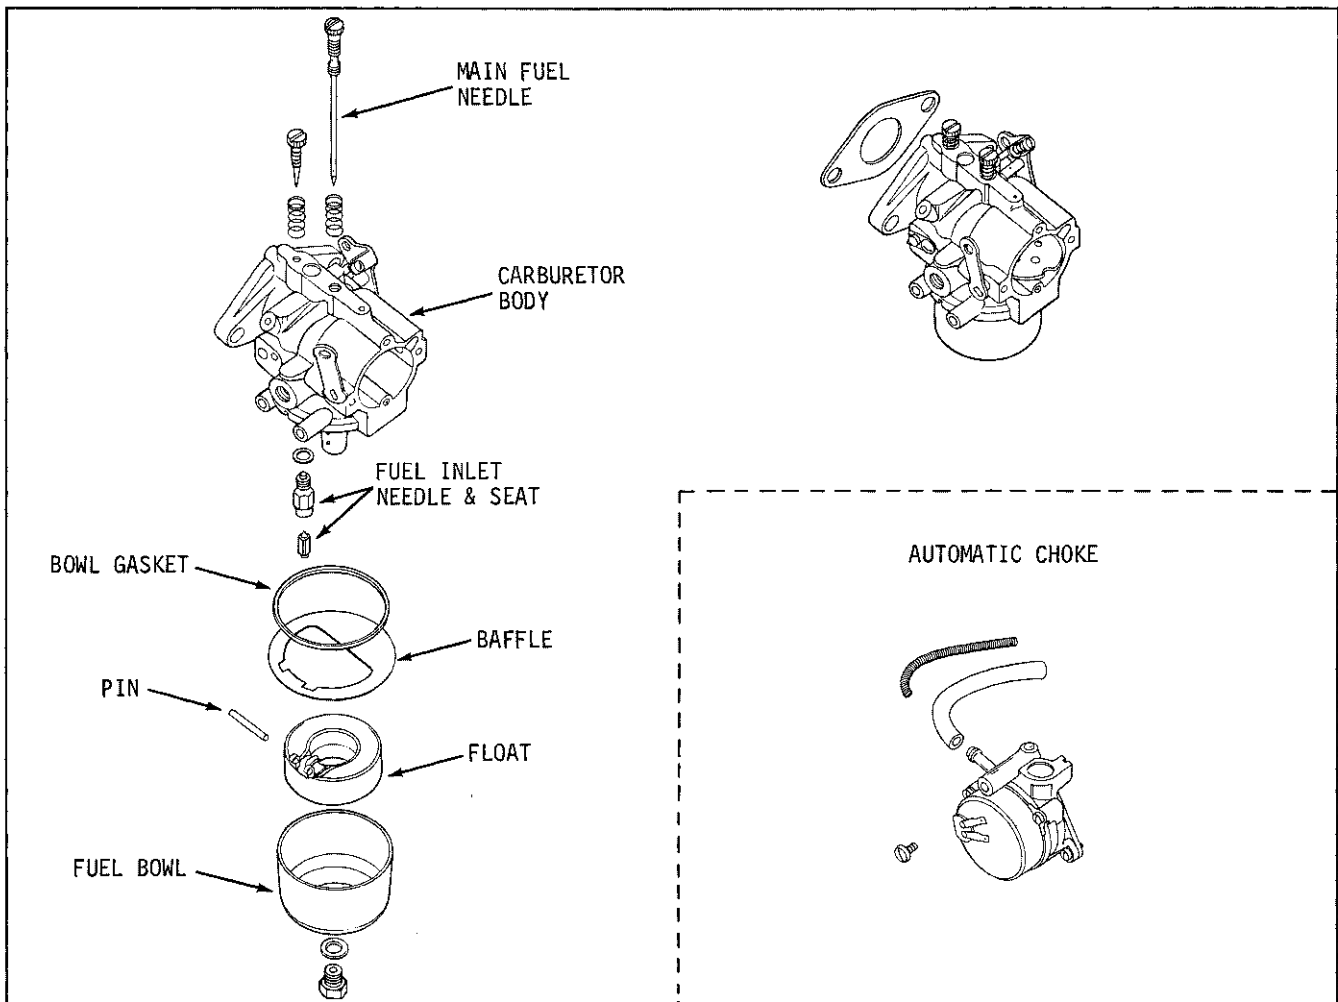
DISASSEMBLED VIEW -- SIDEDRAFT CARBURETOR
